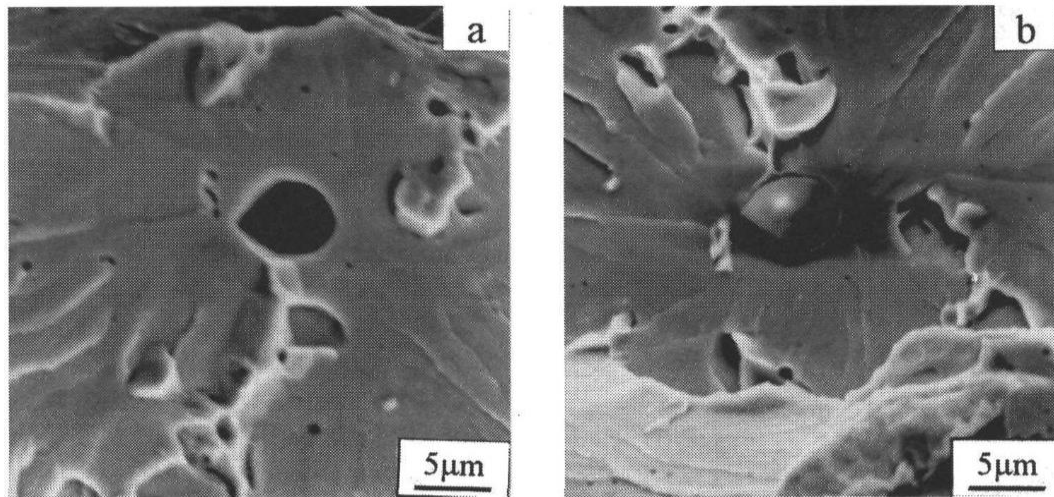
Appearance of brittle fracture initiation point (Al-Si-Mn inclusion) on left a) and right b) fracture surface of specimen $B \times B$ with surface crack in the heterogeneous weld, indicated by EDX analysis.
